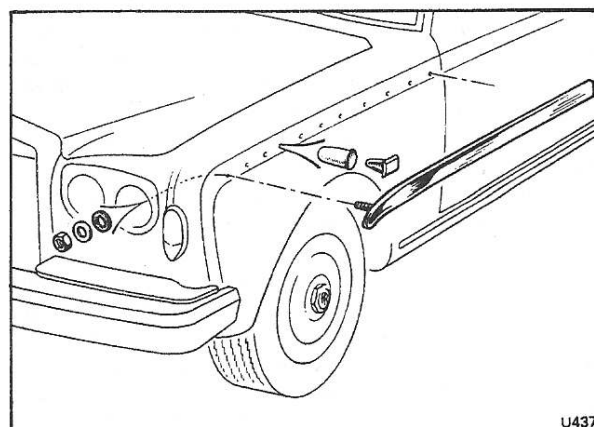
Body waist moulding strips (Silver Shadow II, Bentley T2 and Silver Wraith II)
